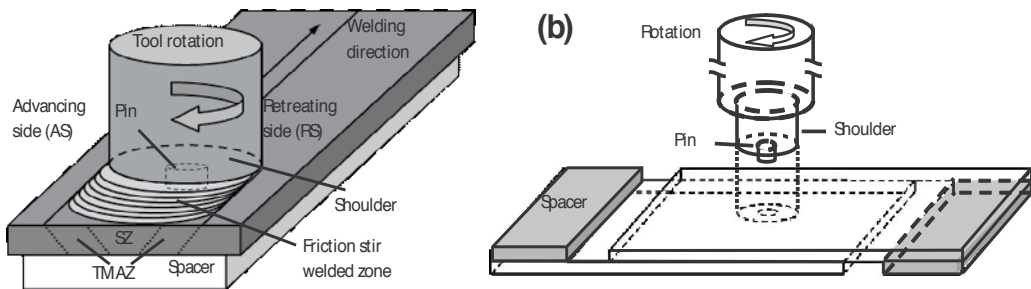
Schematic illustrations of (a) friction stir welding (FSW); (b) friction stir spot welding (FSSW).
